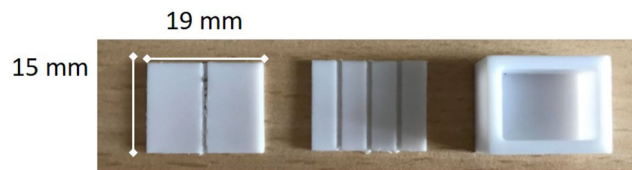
Sensor PTFE packaging. On the left the bottom part of the channel. On the middle the top part of the channel. The lateral channels are used for gluing. On the right side the cover that goes on top of the PCB is shown.
